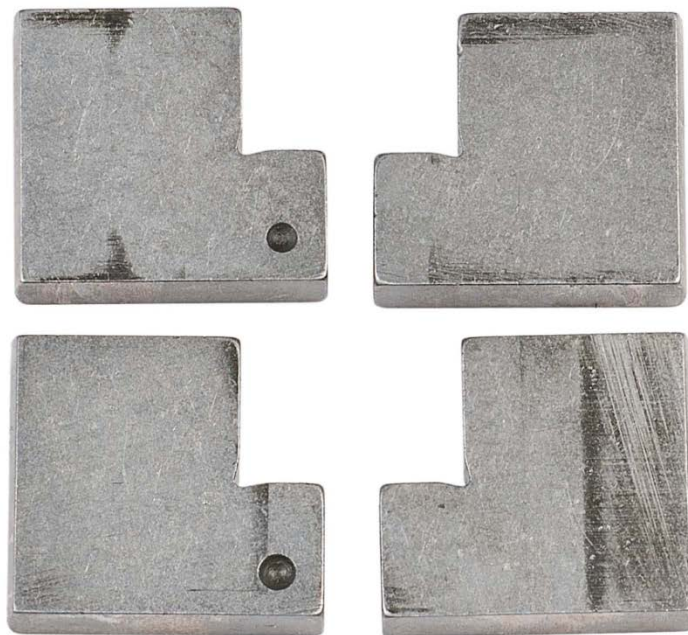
Pump SN: 16393232 Transfer Pump Blade Sides with 35-Hours Testing with JP-8 Fuel
